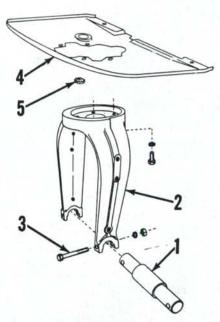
Exploded view of single front wheel fork and associated parts.
